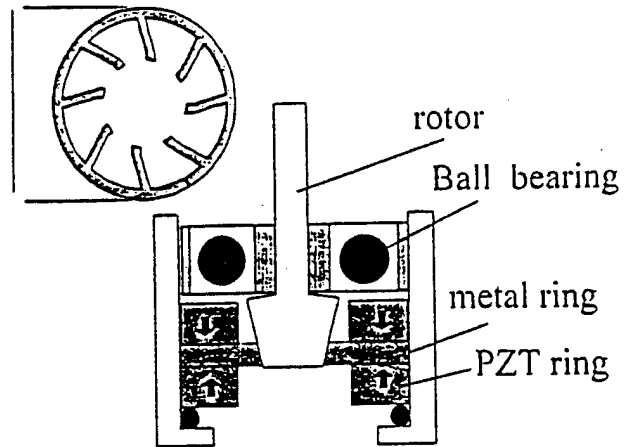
Compact ultrasonic motor with a "windmill"-shaped torsional coupler.
